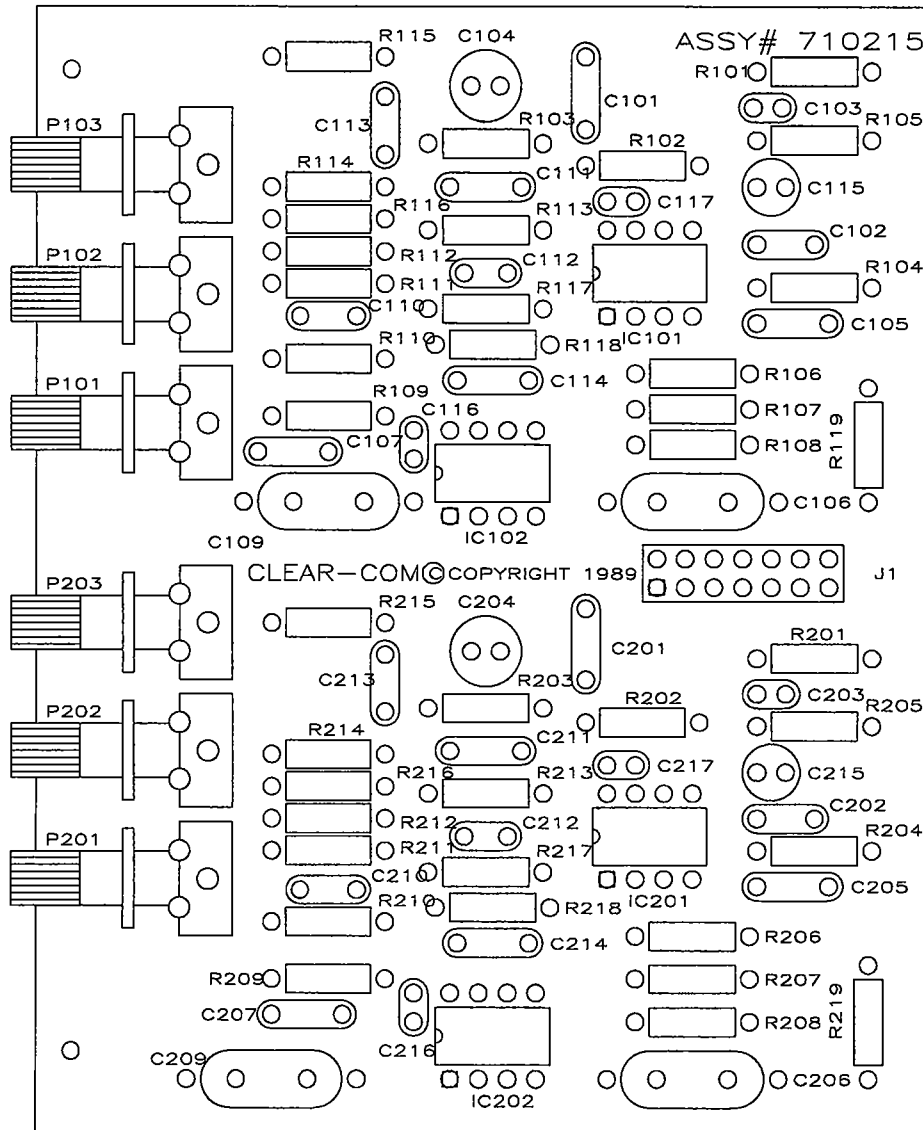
Assembly Drawing - CCI-22 Null PCB, Rev. D
